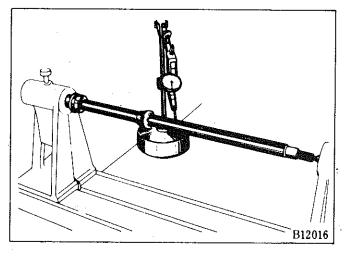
Inspecting piston rod bend (imported and 2,6 litre strut)
